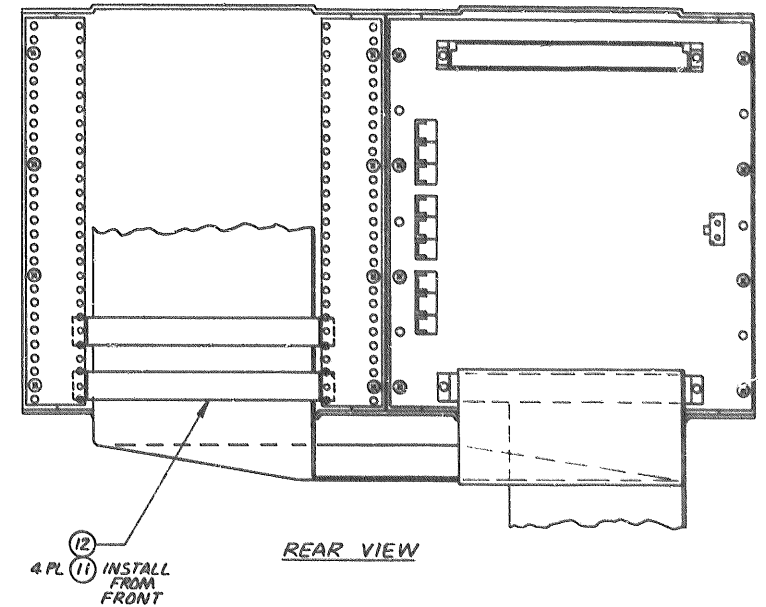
VME+I/O module Expansion Card Cage Assembly Diagram
